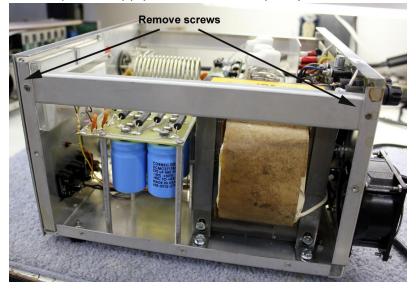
side brace and/or front circuit board spacers can be removed for more working room
